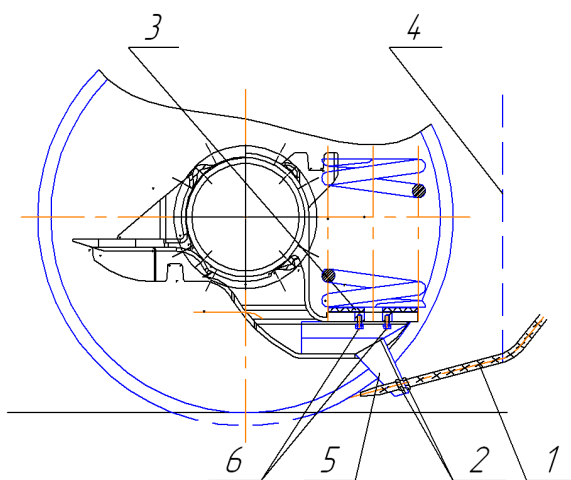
General view of the upper part of the tri-axial locomotive carriage equipped with a modernized sand system 1 – rubber pipe, 2 – lug nuts, 3 – springs reliance, 4 – safety chain with clip, 5 – bracket, 6 – bracket bolts
